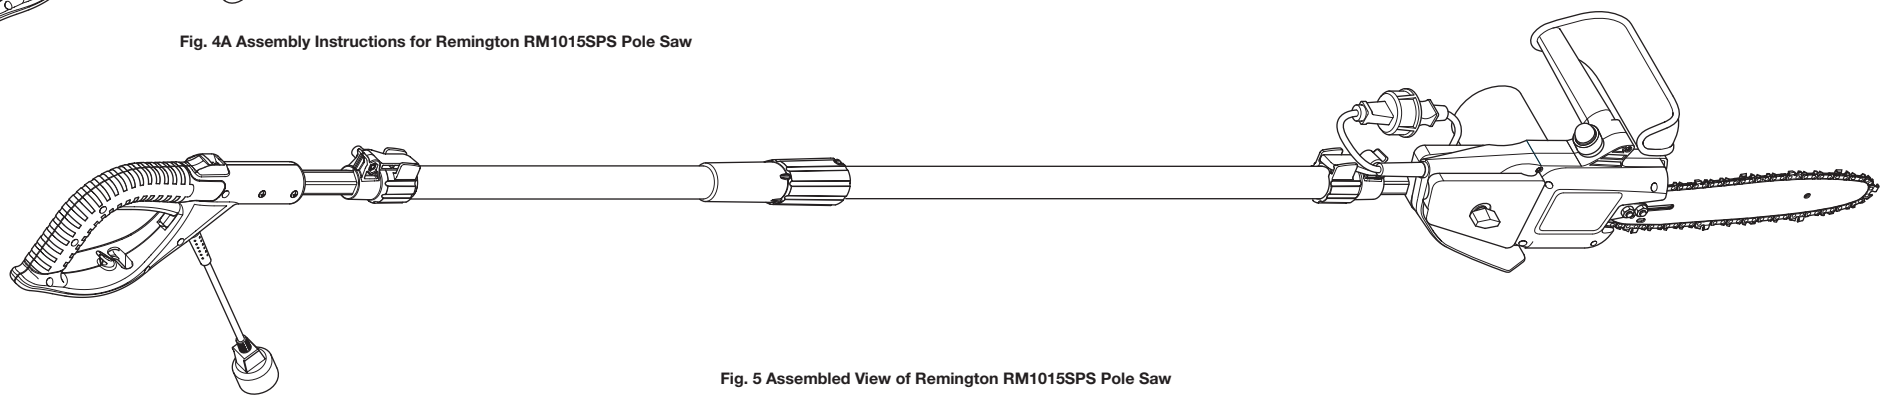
Assembled View of Remington RM1015SPS Pole Saw
